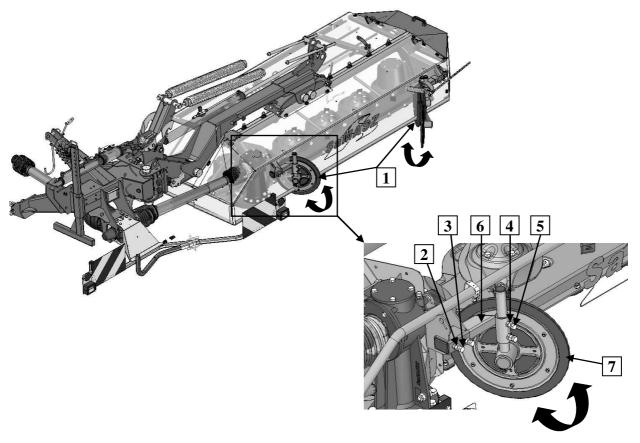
Adjustment of swath guides: 1 - swath guide, 2 - locknuts, 3- arm adjustment screws, 4 - locknuts, 5- shield adjustment screws, 6- guide arm, 7- shield
